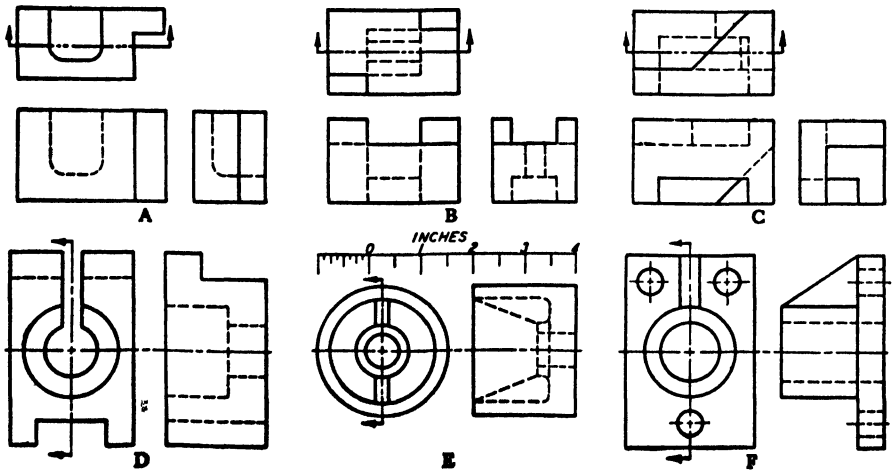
Prob. 140. Copy the views freehand (enlarged). Show a view in section on the plane indicated.
